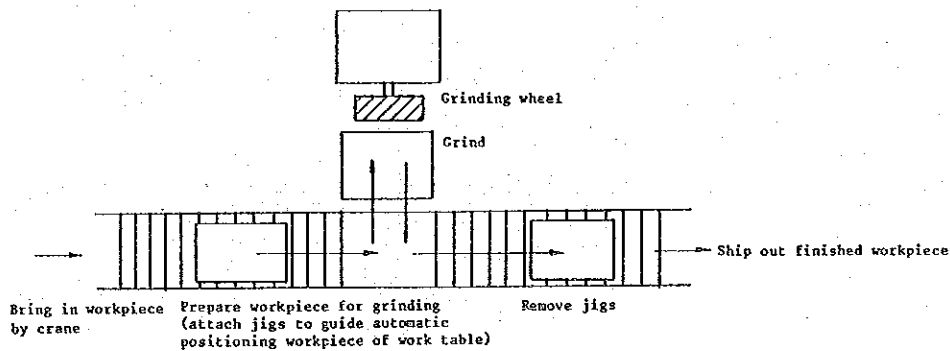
Example of ancillary arrangement for automatic grinding
